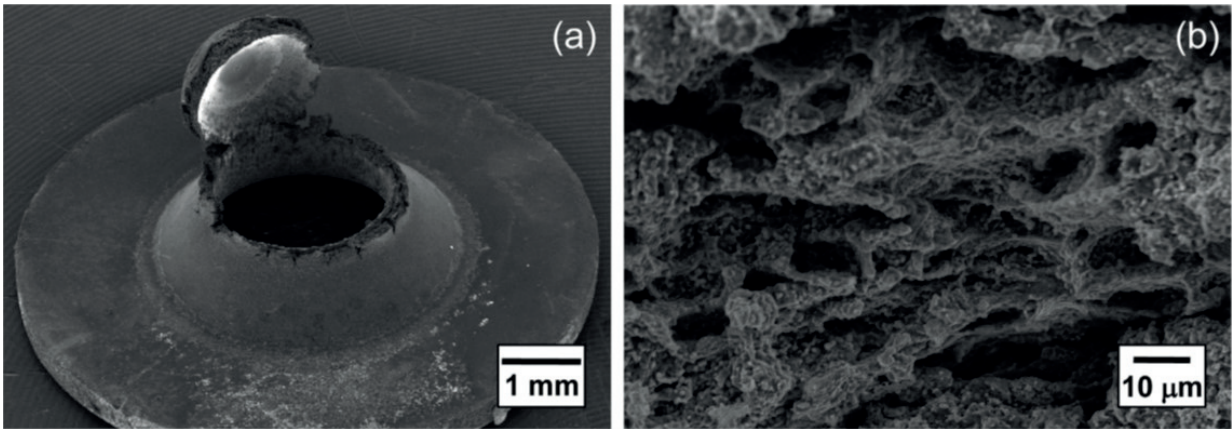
(a) A typical SP creep ductile fracture surface for a test on HN9L at 725°C at 140N and (b) fracture surface depicting ductile transgranular mode of fracture [28].
